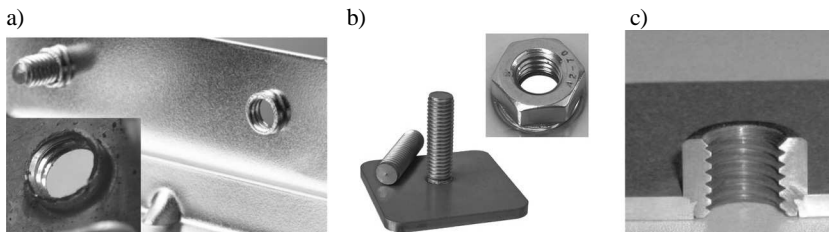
The basic solutions of the thread connections in the sheet metal structures: a) thread cut in the sheet material, b) the additional part with thread welded with sheet, c) the blind rivet nut with internal thread
